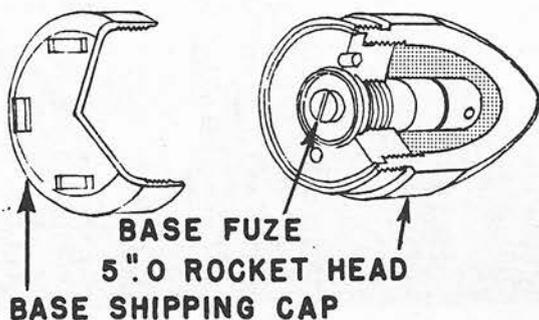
B3.—Rocket Head Mark 8, with fuze.
